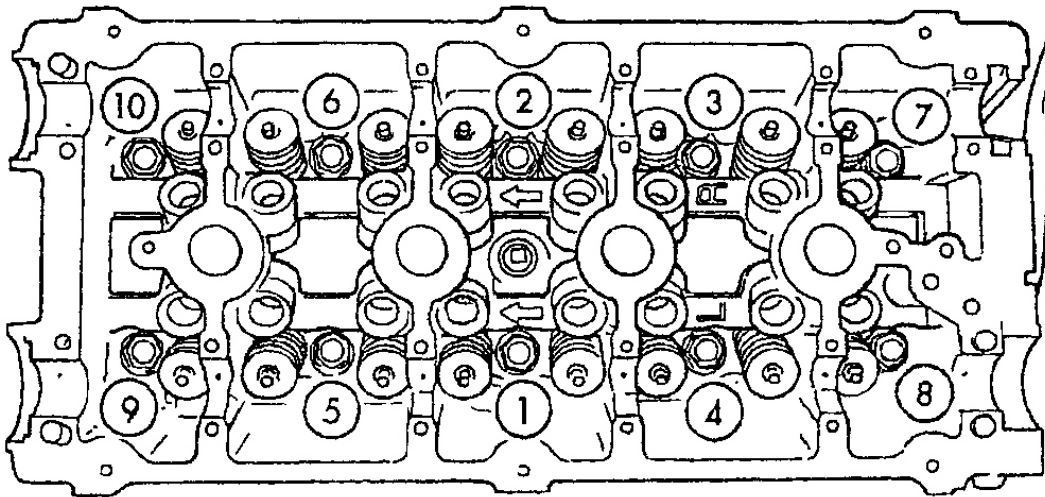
Camshaft Bearing Cap Bolt Tightening Sequence
